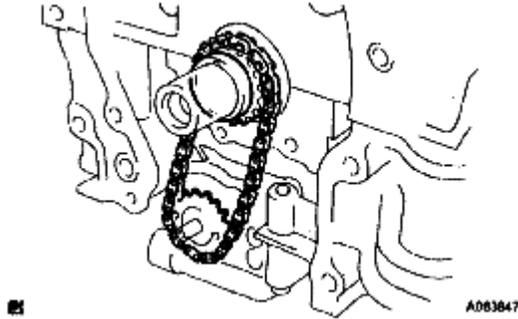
Identifying Chain Tensioner, Oil Pump Driven Sprocket And Chain
